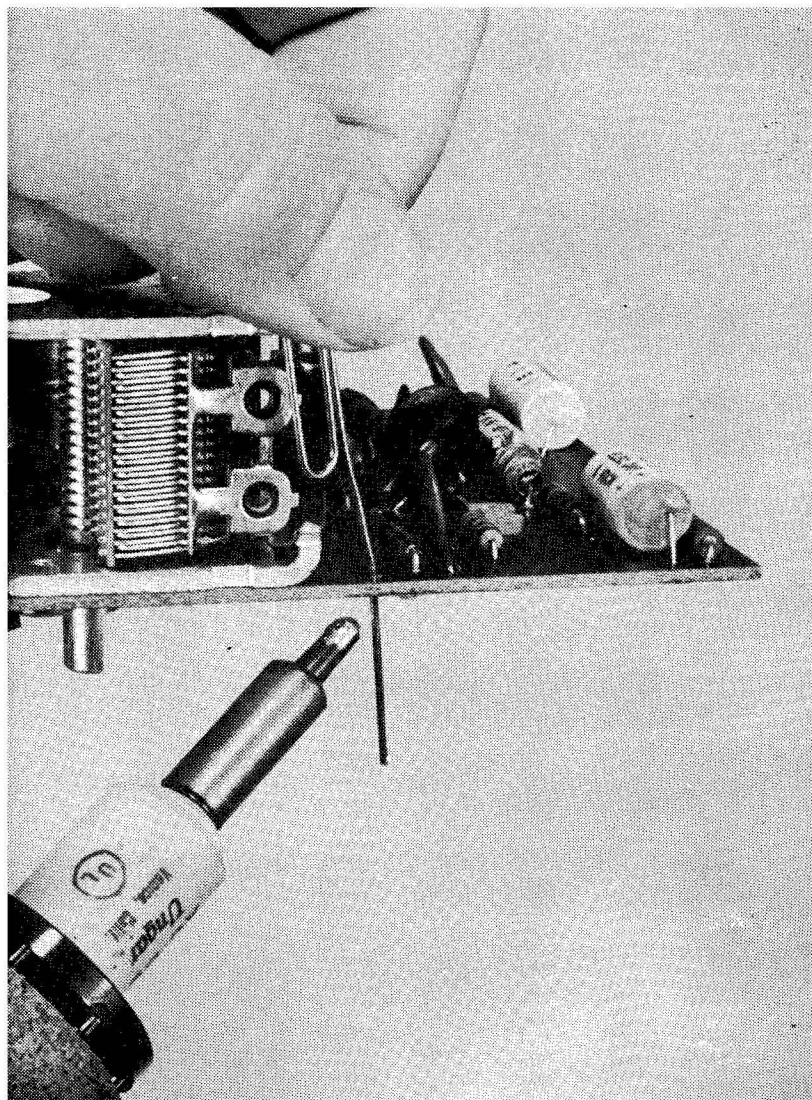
You can use a straightened paper clip to "open" solder holes.
